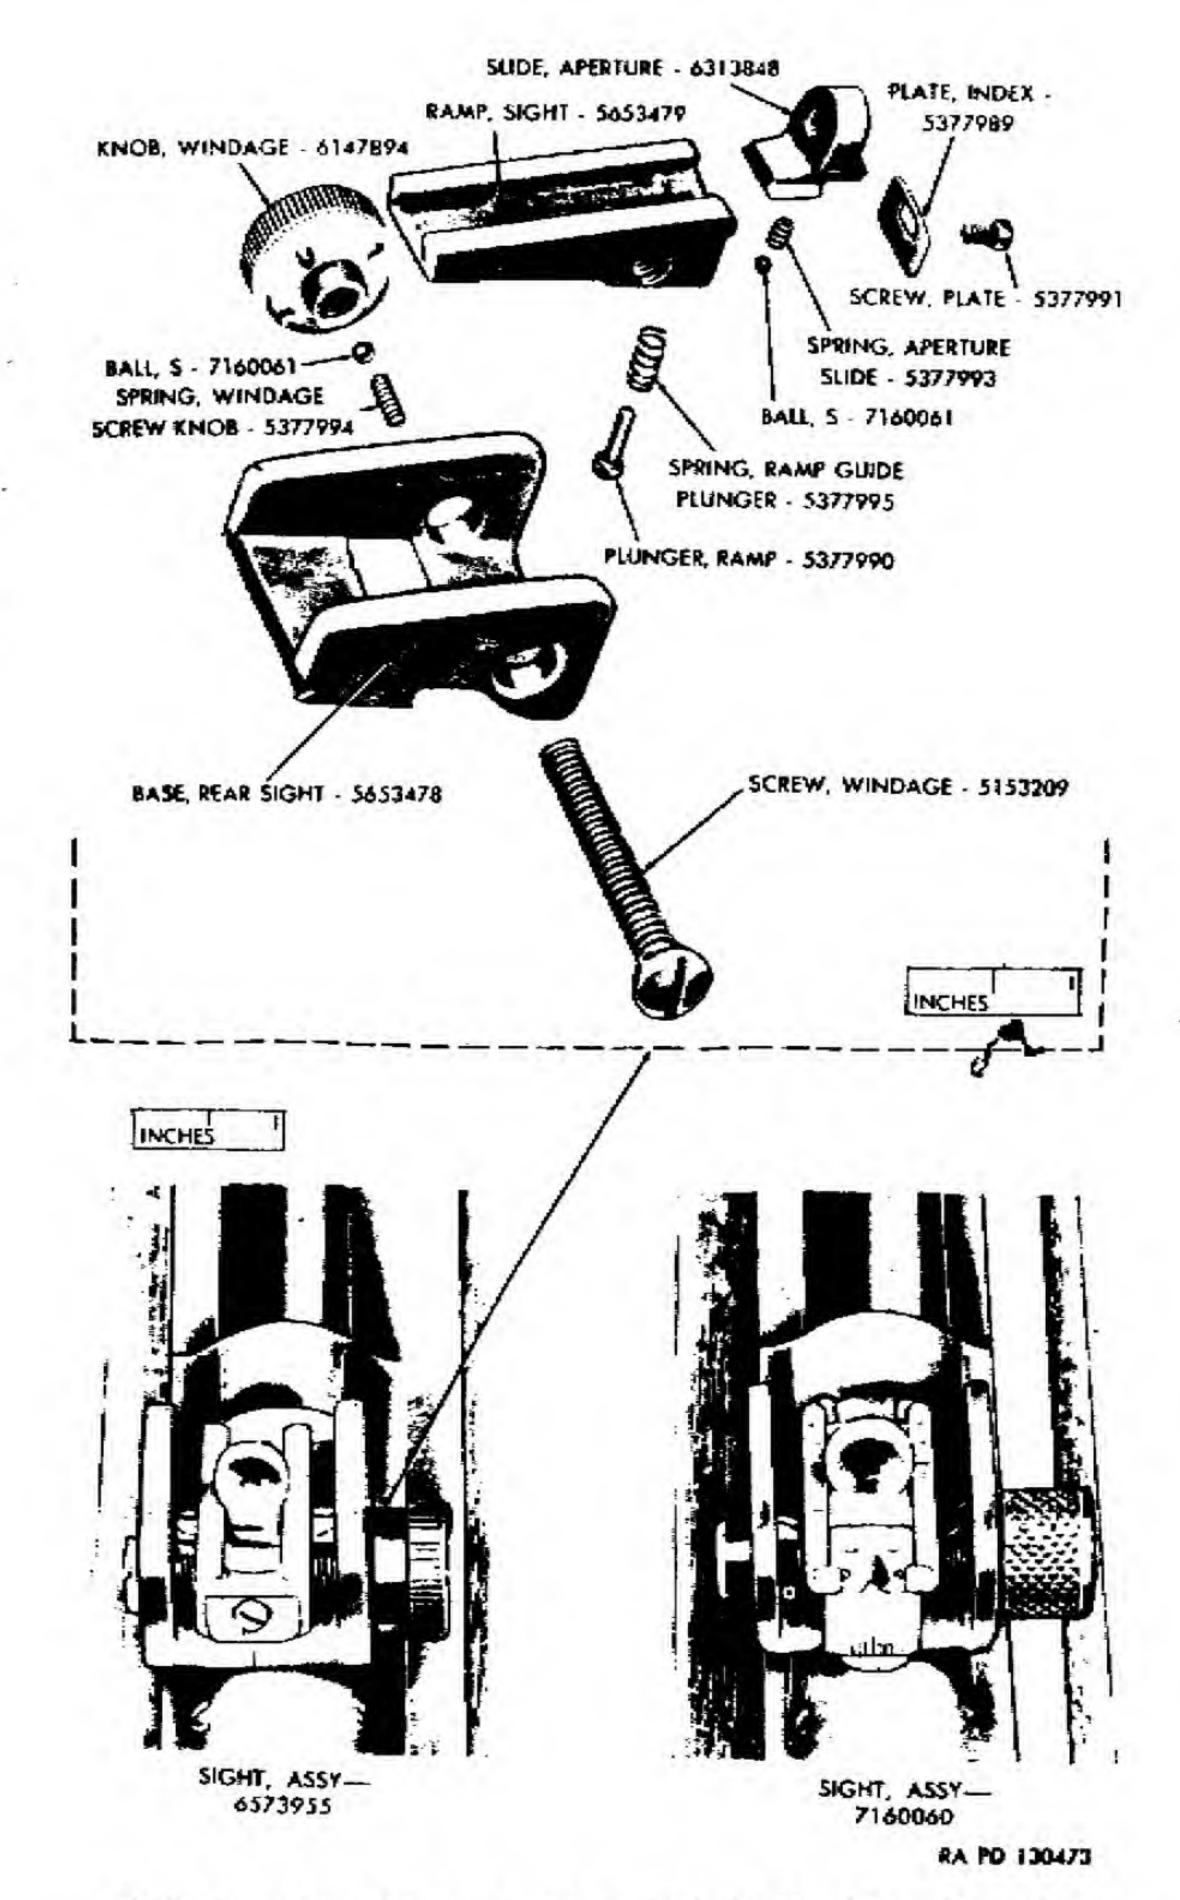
Adjustable rear sight assembly for M1, M1A1, M2 carbines.
